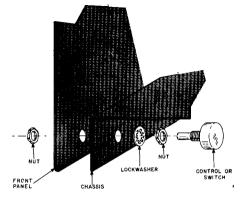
HOW TO MOUNT THE FRONT PANEL WITH A CONTROL
